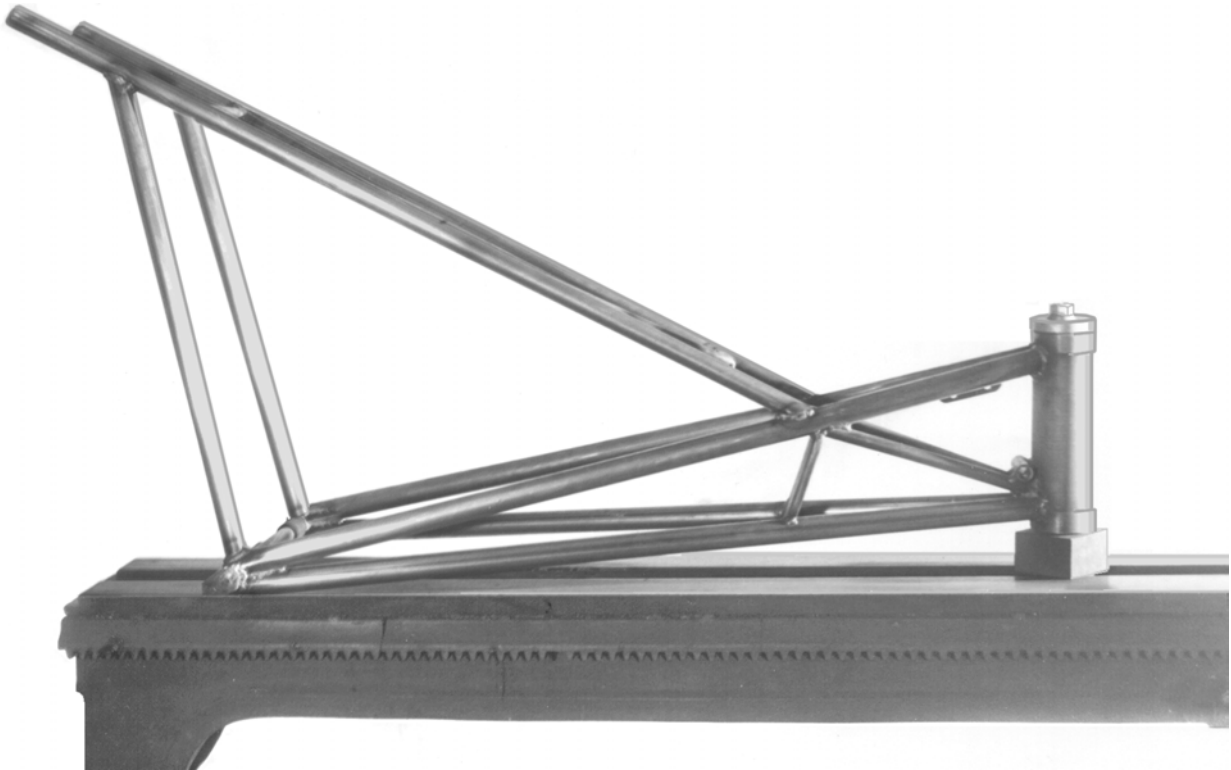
Compare this with fig. 16.5. The head stock is simply bolted at right angles to the lathe bed with only a parallel spacer block between. This is both accurate and rigid. The down side is that it is more difficult to visualize the frame as you are fabricating it, and a taller support jig would be necessary to hold the seat tubes, but required accuracy here is of a lower order than between the head stock and the swing-arm pivot.
